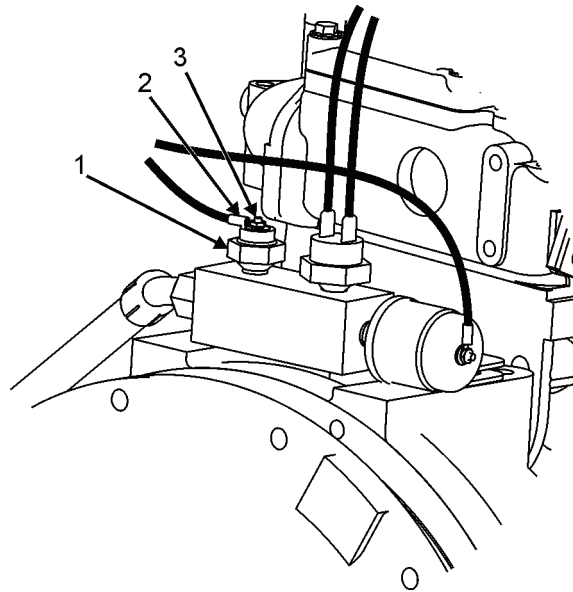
Oil Pressure Switch (Warning Light) (Removal and Installation)
